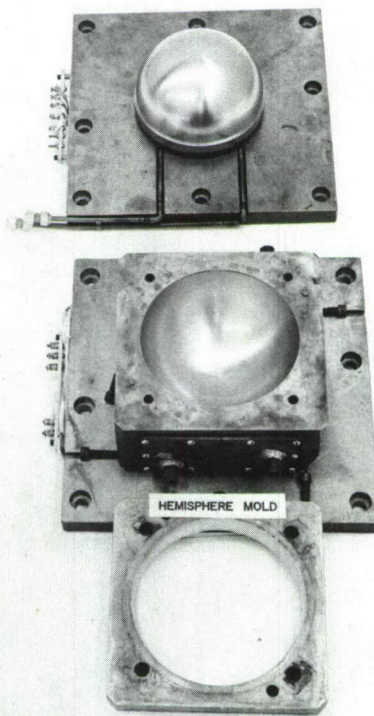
The Hemisphere Mold Disassembled to Show its Component Parts
